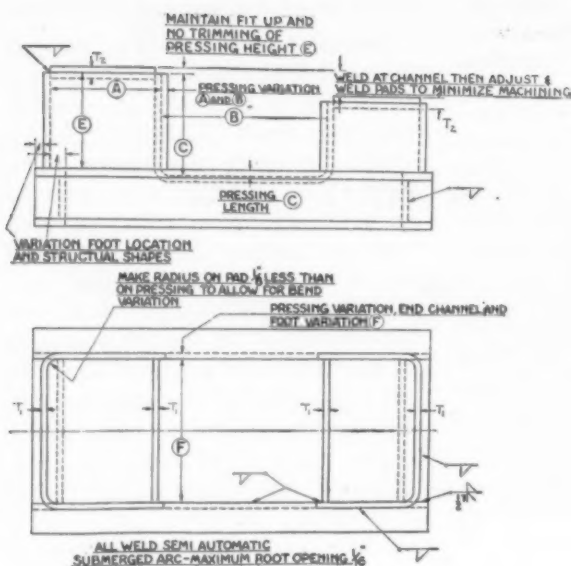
Bedplate design for economical automatic welding. Maximum fit-up tolerances decrease the finishing operations to a minimum
